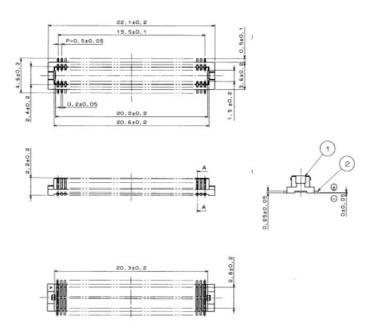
Mechanical dimensions of Hirose DF12C 80-pin receptacle
